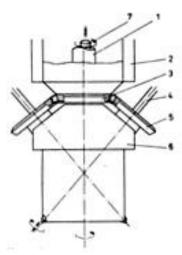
Brass-coating device for cylinder-bushing by boring machine
